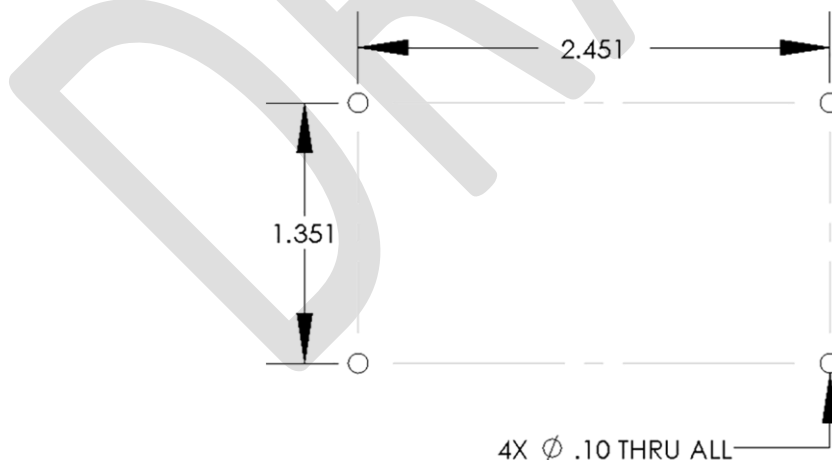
Mounting Hole Pattern Drawing (SCALE 1:1)
